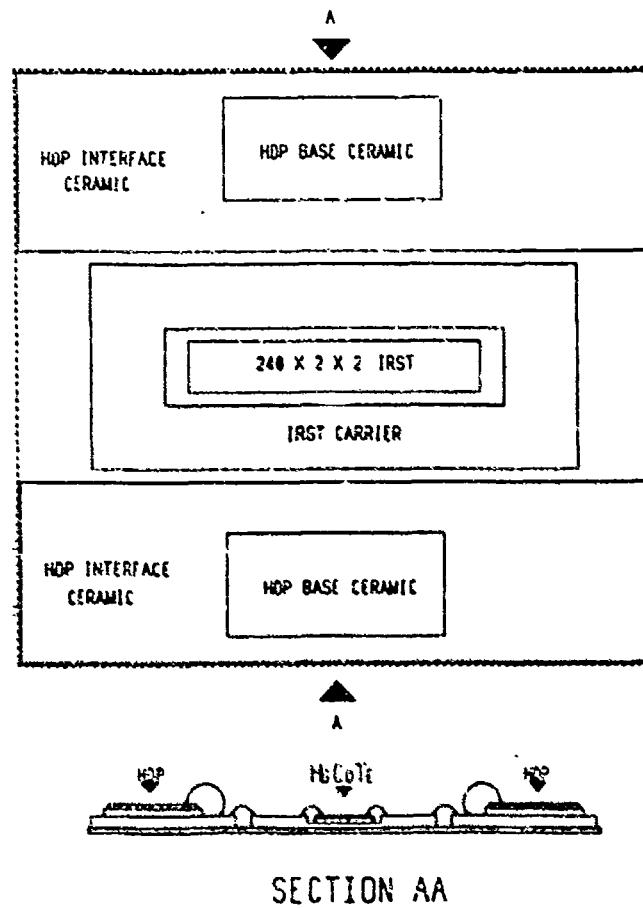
Schematic diagram and cross-section of linear, bondable IRST ceramic carrier design.
